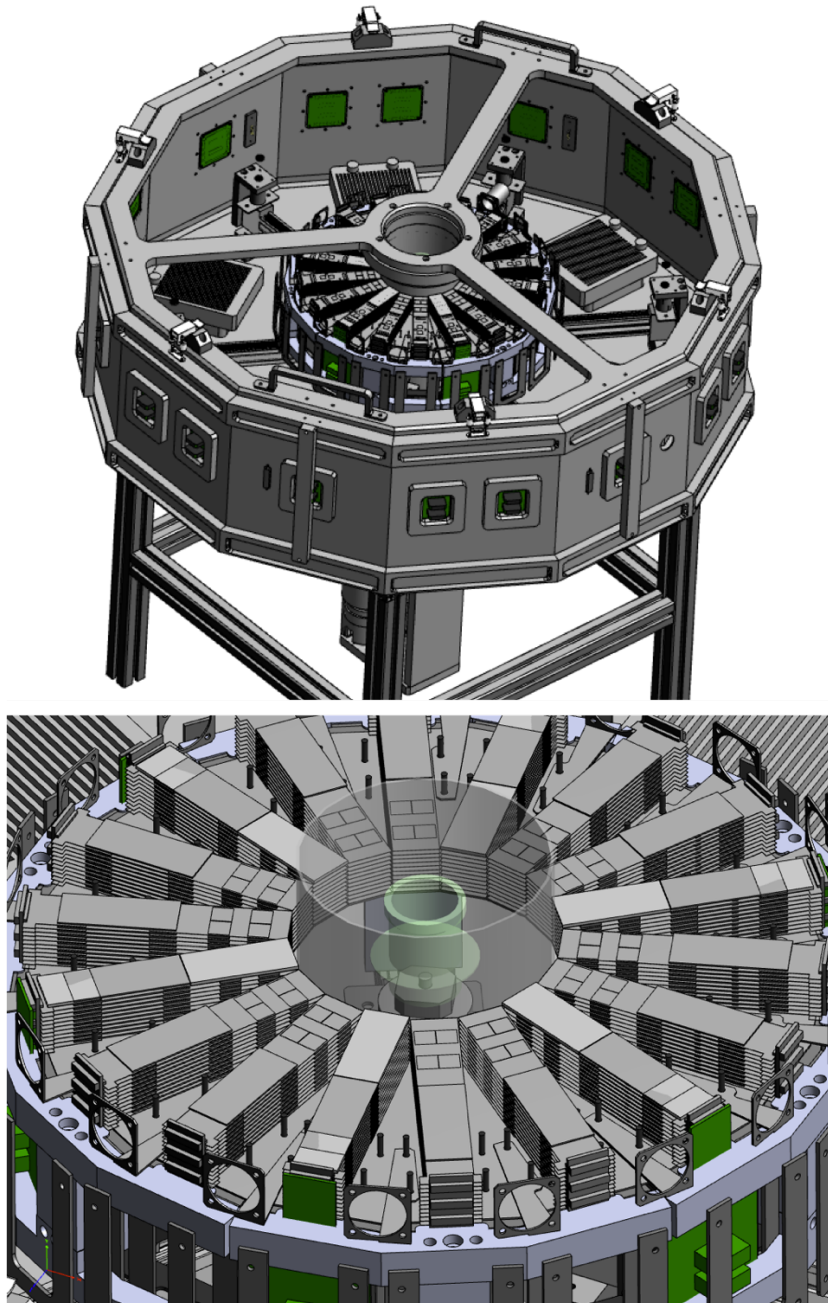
3D CAD design of the full VIP PET scanner prototype and detail of the detector module ring.
